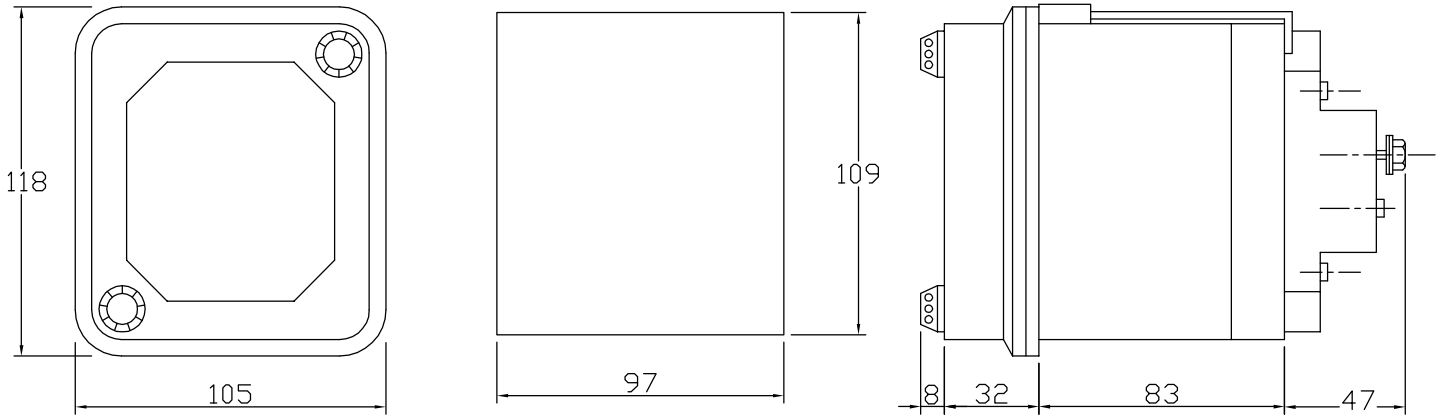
Case and panel cut-out dimensions for case 1/4N (all dimensions in mm)
